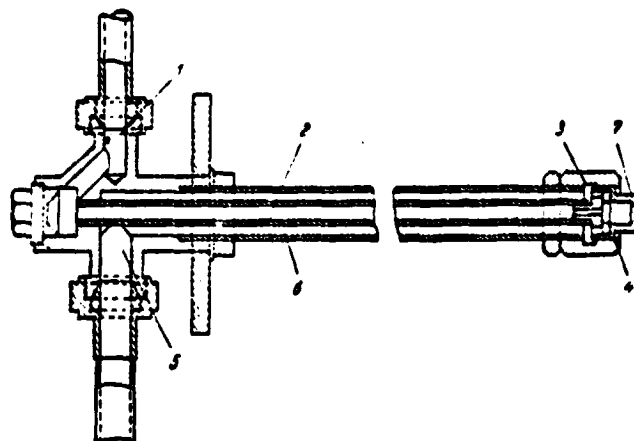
Pneumatic (or steam) centrifugal type spray nozzle.
